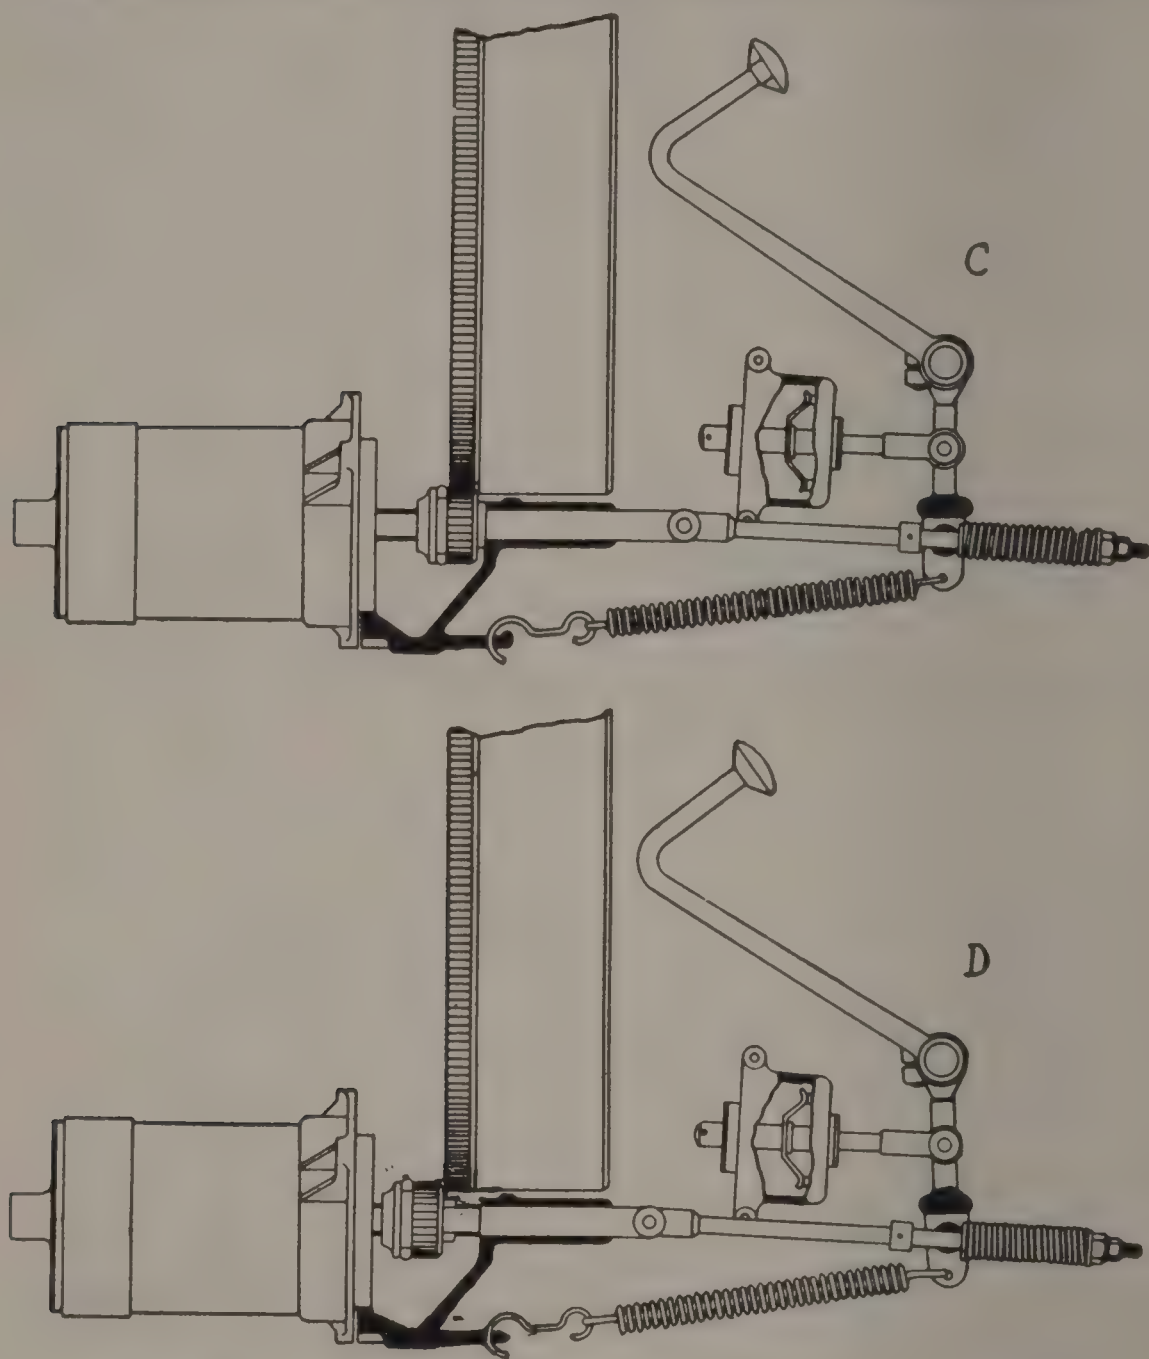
C, cranking. note cap between collar on shifting rod and clevis pin—shifting fork is against stop, and shifter spring is compressed slightly. D, about to crank, when gears are not meshed, teeth are butting but switch has made contact. Shifter spring is compressed strongly, ready to draw pinion into mesh
